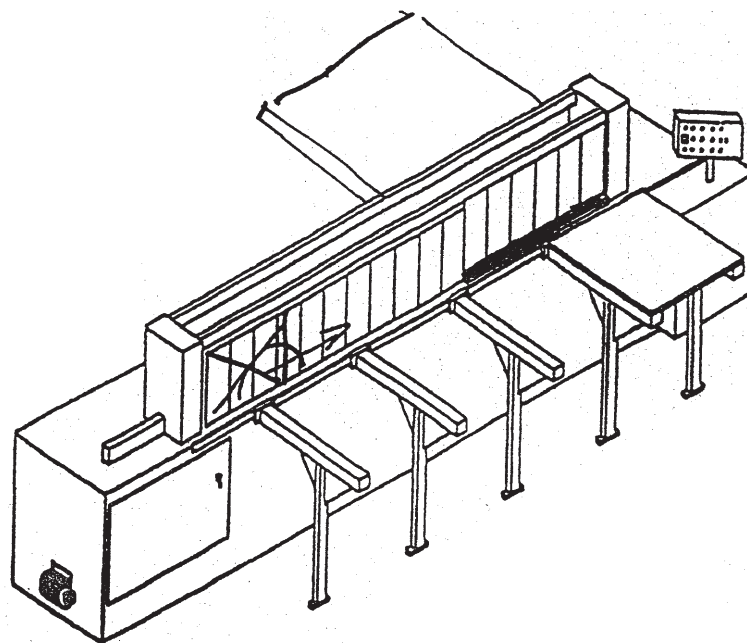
Sawing machine — Longitudinal traversing — Table type
